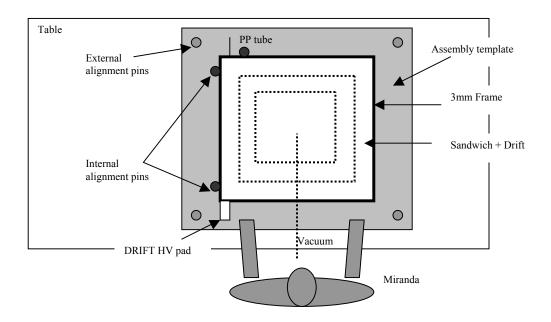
Step 1 of assembly: positioning of SANDWICH + DRIFT on assembly template
